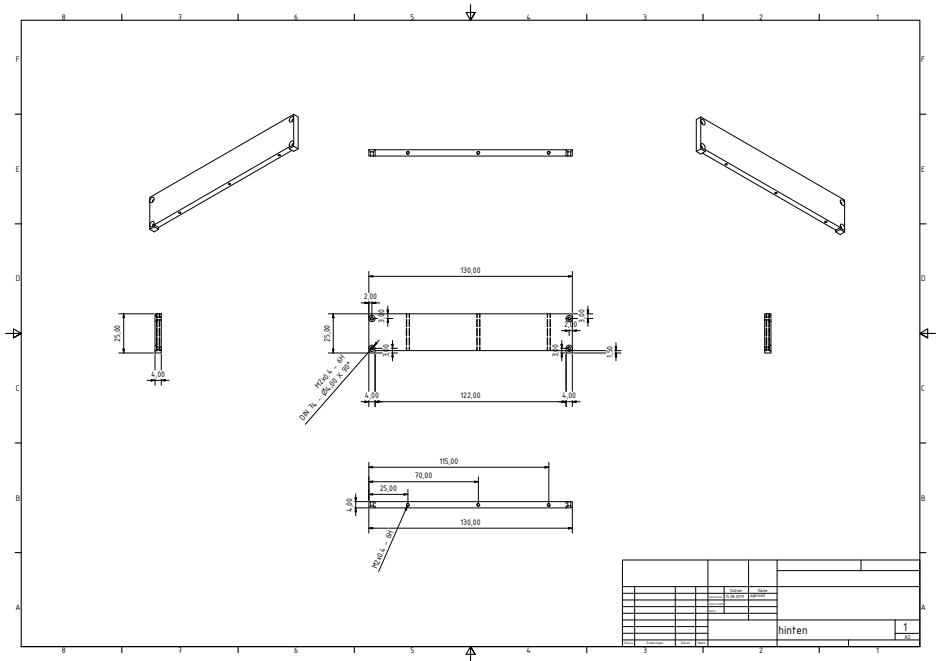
Technical drawing of the rear plate of a box from the front part of the pair spectrometer.
